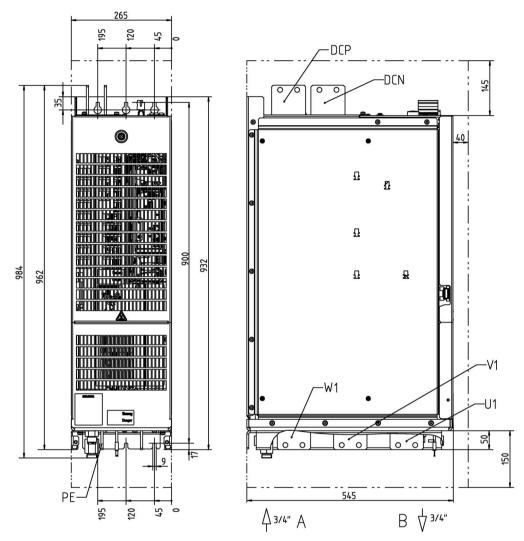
Dimension drawing Active Line Module, frame size GXL Front view, side view
